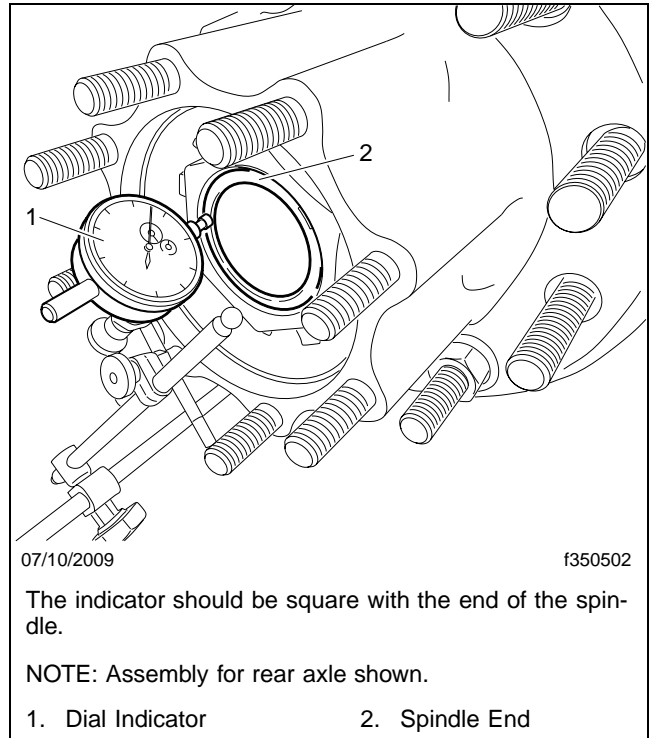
, Indicator Square with the Spindle (rear hub shown)
